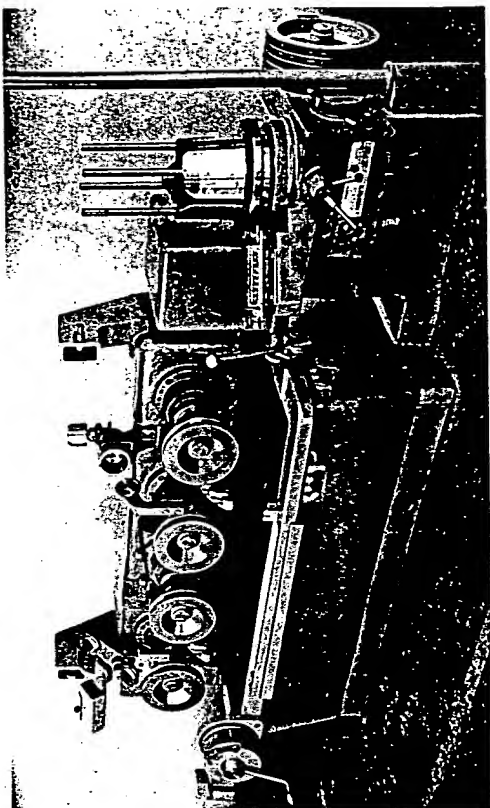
Malmedie Type MMN III machine. This machine operates with cones completely immersed in the tank of drawing and cooling lubricant. The drawing cones can be swivelled from horizontal threading position into vertical operating position by a pushbutton-operated geared motor. The machine shown here has four drawing cones and draws wire 3 mm input (0.118 in.) mild steel or 2.6 mm (0.140 in.) high carbon wire. Power rating is 55 hp. (Courtesy Malmedie & Co. Maschinenfabrik G.m.b.H., Dusseldorf)
